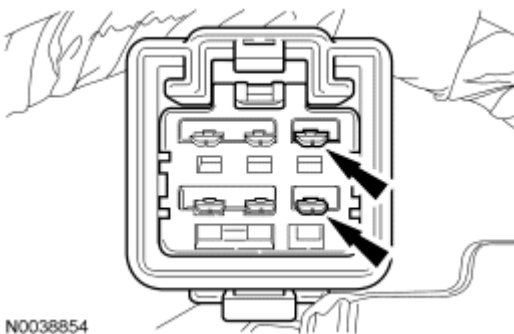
Locating Power Seat Track Motor Electrical Connector Pins
